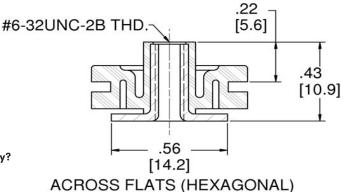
Part Dimensions - J-17736 Series (With Threaded Ferrule)
